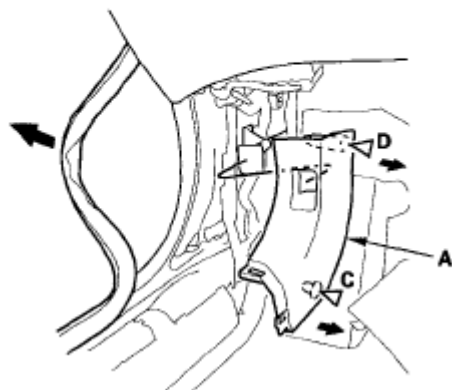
Detaching Clips To Remove Kick Panel (Driver's Side)
